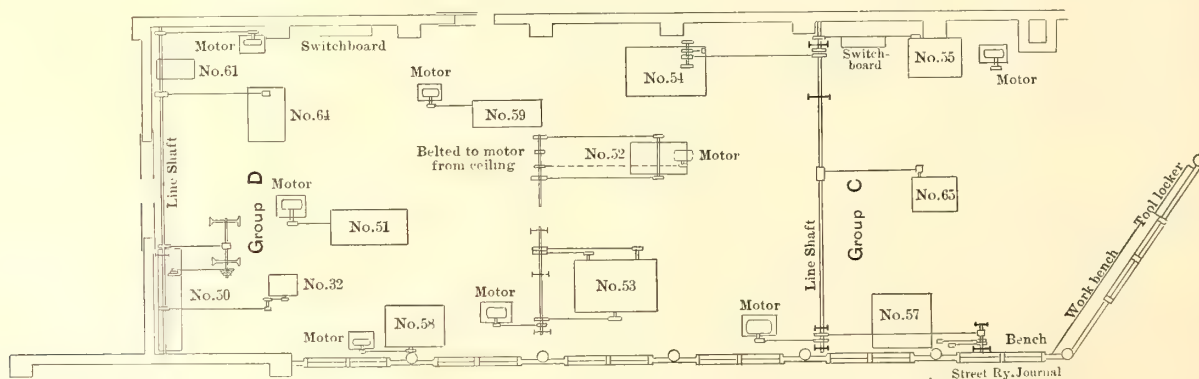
PLAN OF MILL ROOM, SHOWING LOCATION AND DRIVE OF WOODWORKING TOOLS
